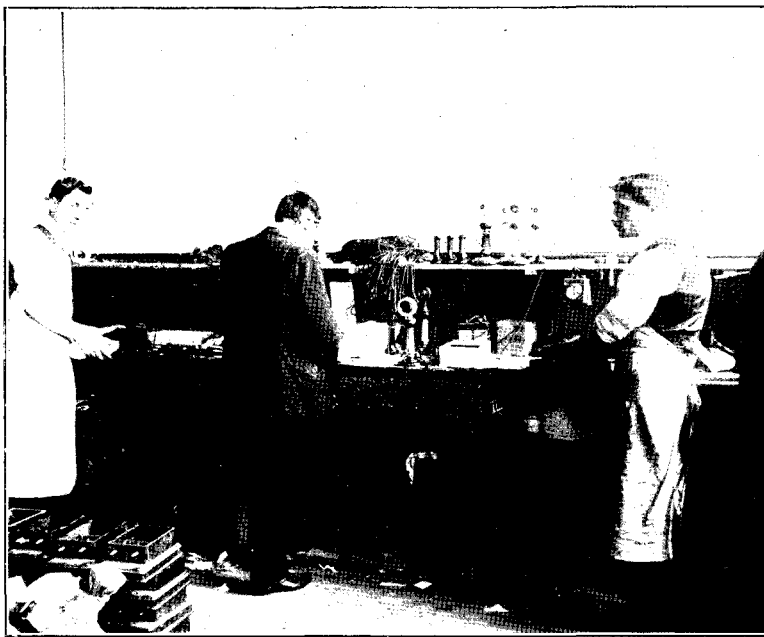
SECTION OF INSTRUMENT FITTING BENCHES.
